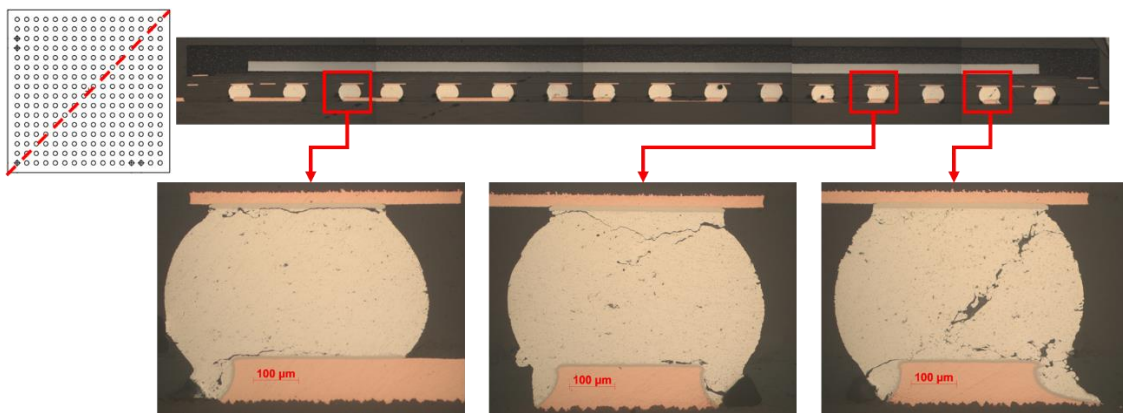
28: Cross-section of BGA with Henkel 3808 along package side.
